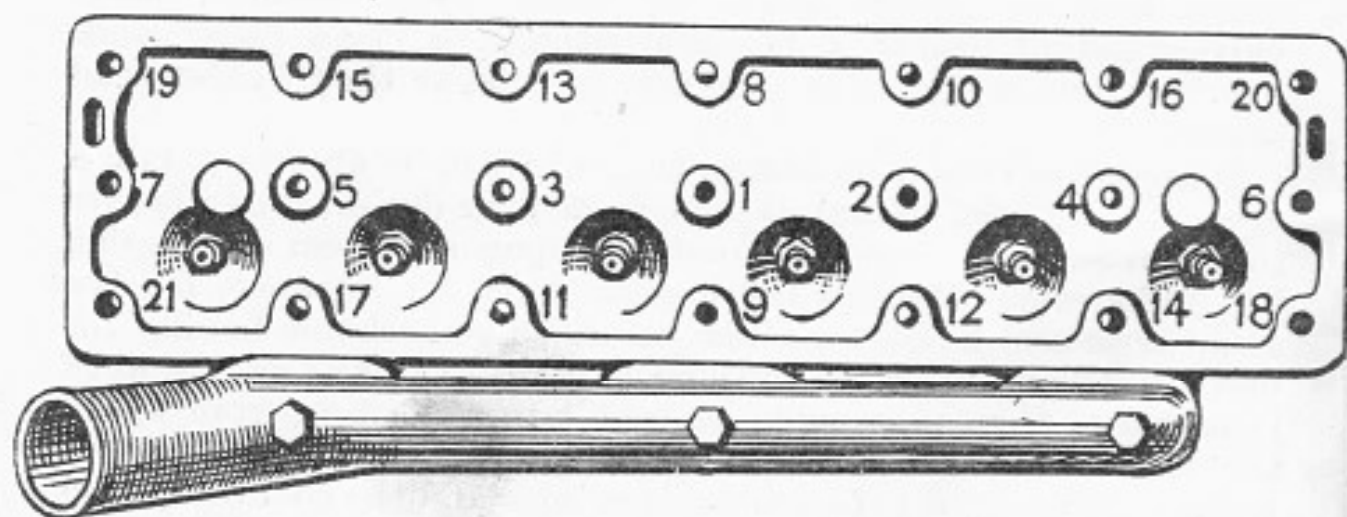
ORDER OF REMOVING CYLINDER HEAD NUTS—
